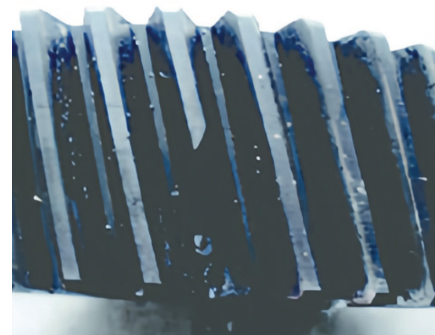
Subway gearbox bevel gear tooth crack [44].
